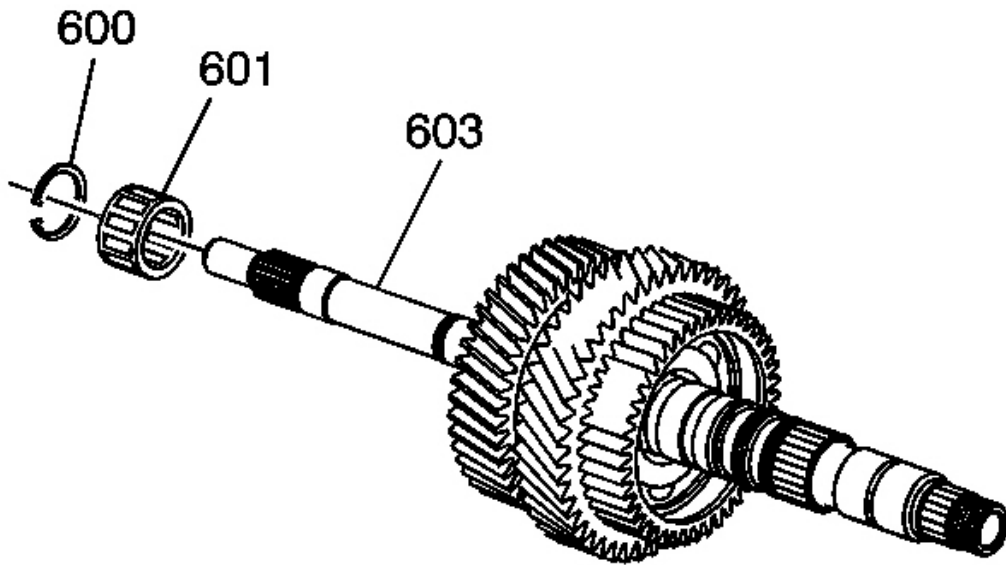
Installing Mainshaft Front Bearing & Retaining Ring
